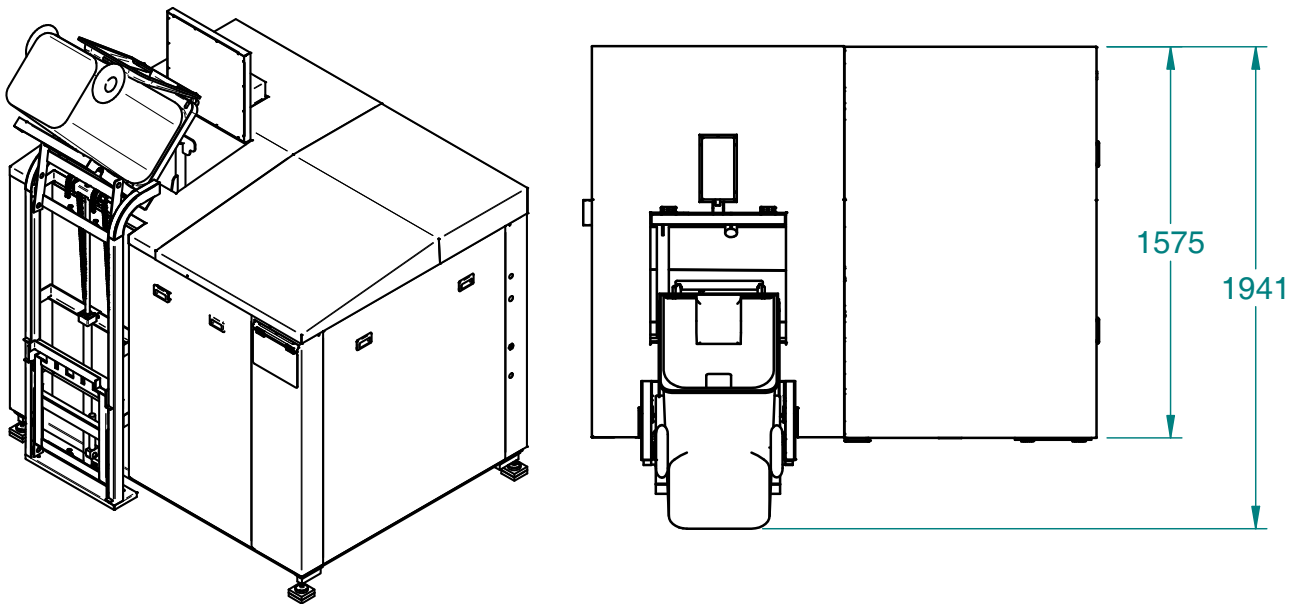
LFC-1000: isometric view and top dimensions (mm)
